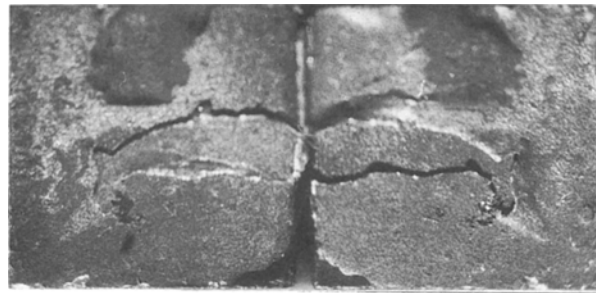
Fracture surface at low magnification showing origin of fracture at underlying layer of Si_3N_4 and subsequent fracture path through braze metal (brazing at 1103 K for 5 min).
